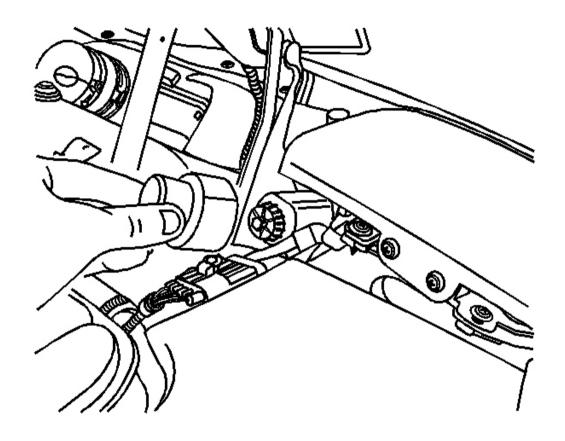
Headlamp Actuator Knob Cover Courtesy of GENERAL MOTORS CORP.
